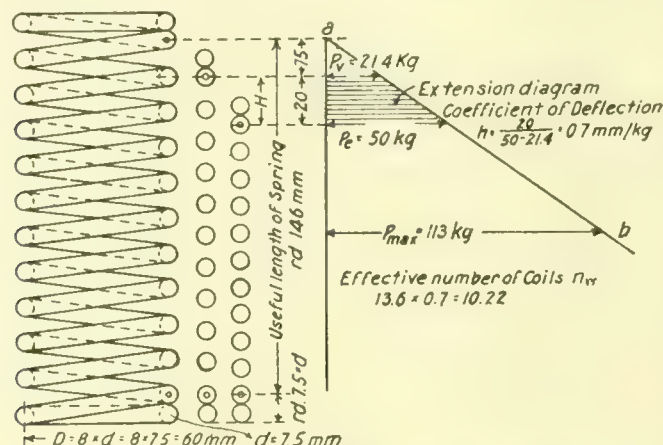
EXTENSION DIAGRAM OF HELICAL SPRING.
